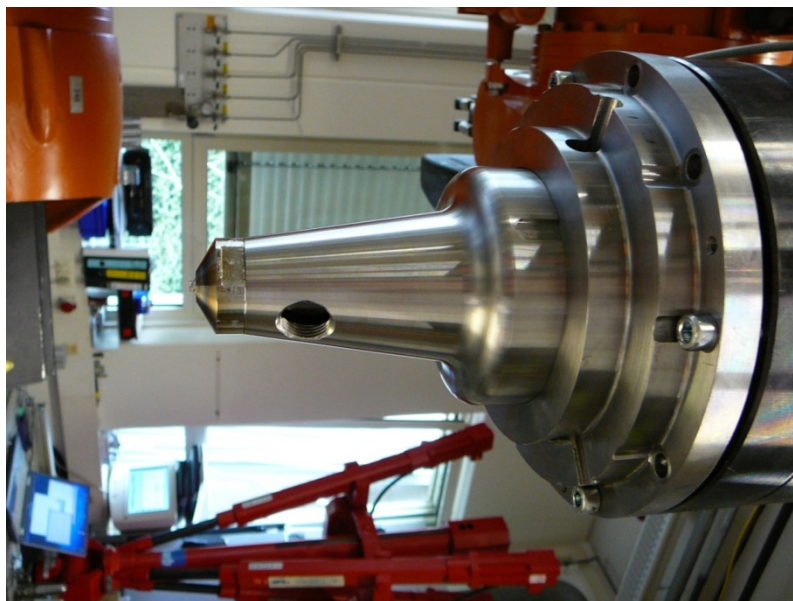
Individually designed DeltaN FSW tool with extra long shaft for access to the joint path directly next to the frame stiffening inner ring
